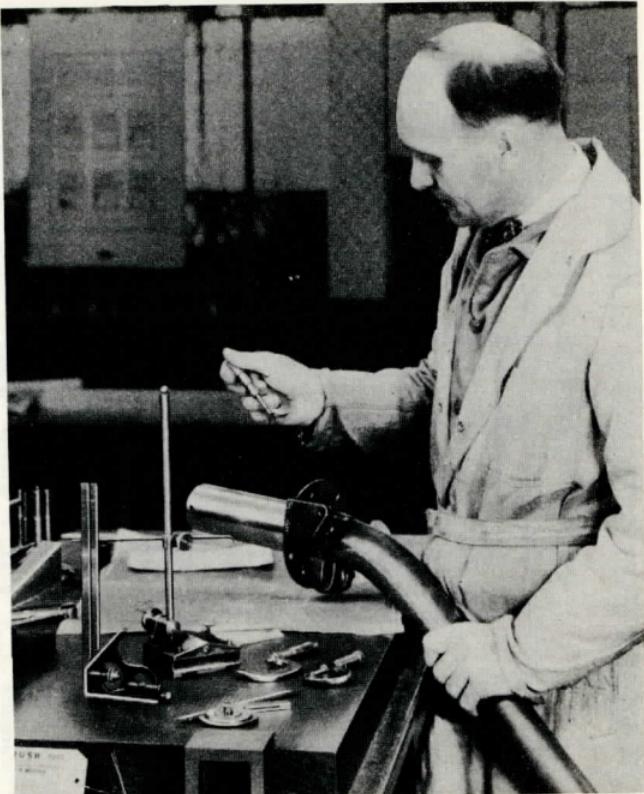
Inspection operations are greatly simplified and expedited by the right kind of precision tools. This man is checking part of an aircraft landing gear.
